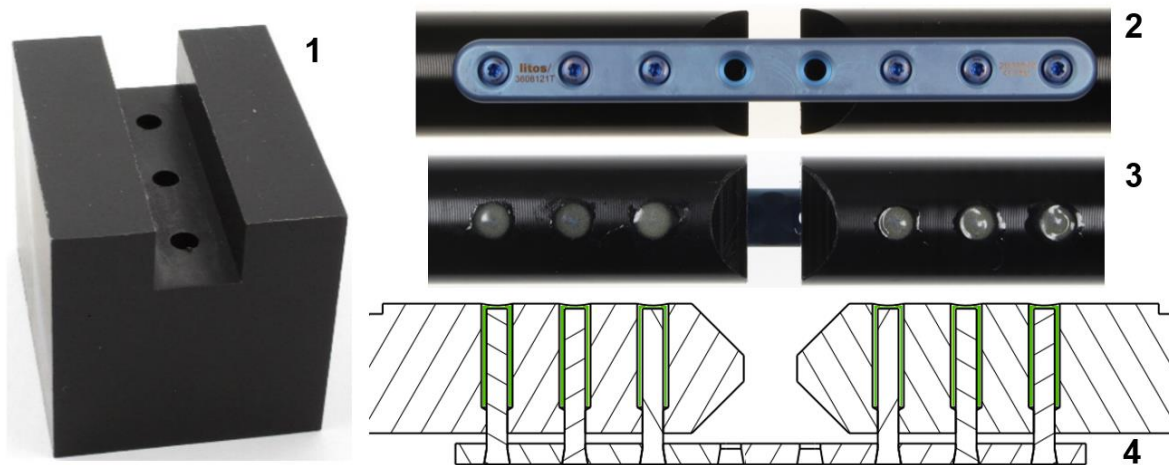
Assembly and fixation of the bone plate-screw construct. Part 1: Guidance tool for the fixation and initial construct assembly. Part 2: Final construct assembly. Part 3: Final BPS construct after assembly and fixation with pre-drilled screw holes filled with glue. Part 4: Drawing of the construct. Pictures provided by Endolab GmbH.
